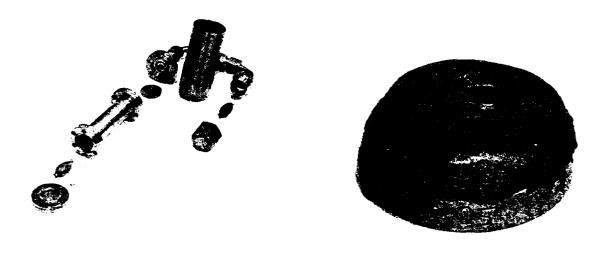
The subassembly parts are shown on the left, and the encapsulated sensor subassembly ready for pad mounting is shown on the right.
